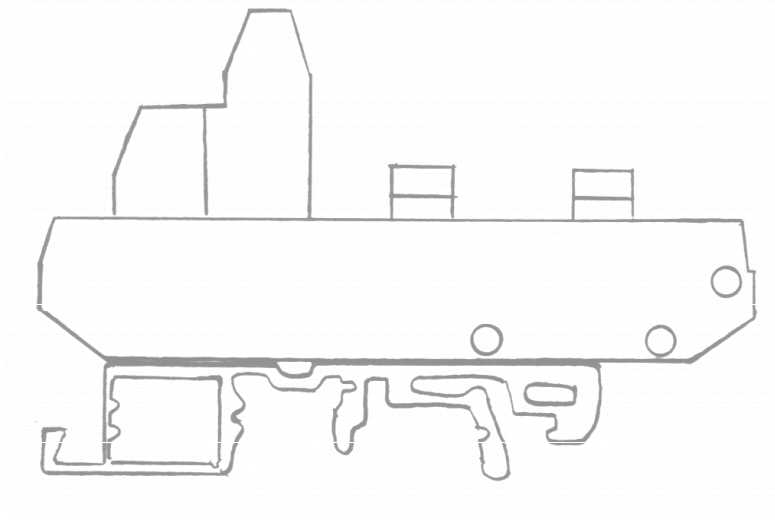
Digital Servo Axis Terminal Board Assembly Side View
